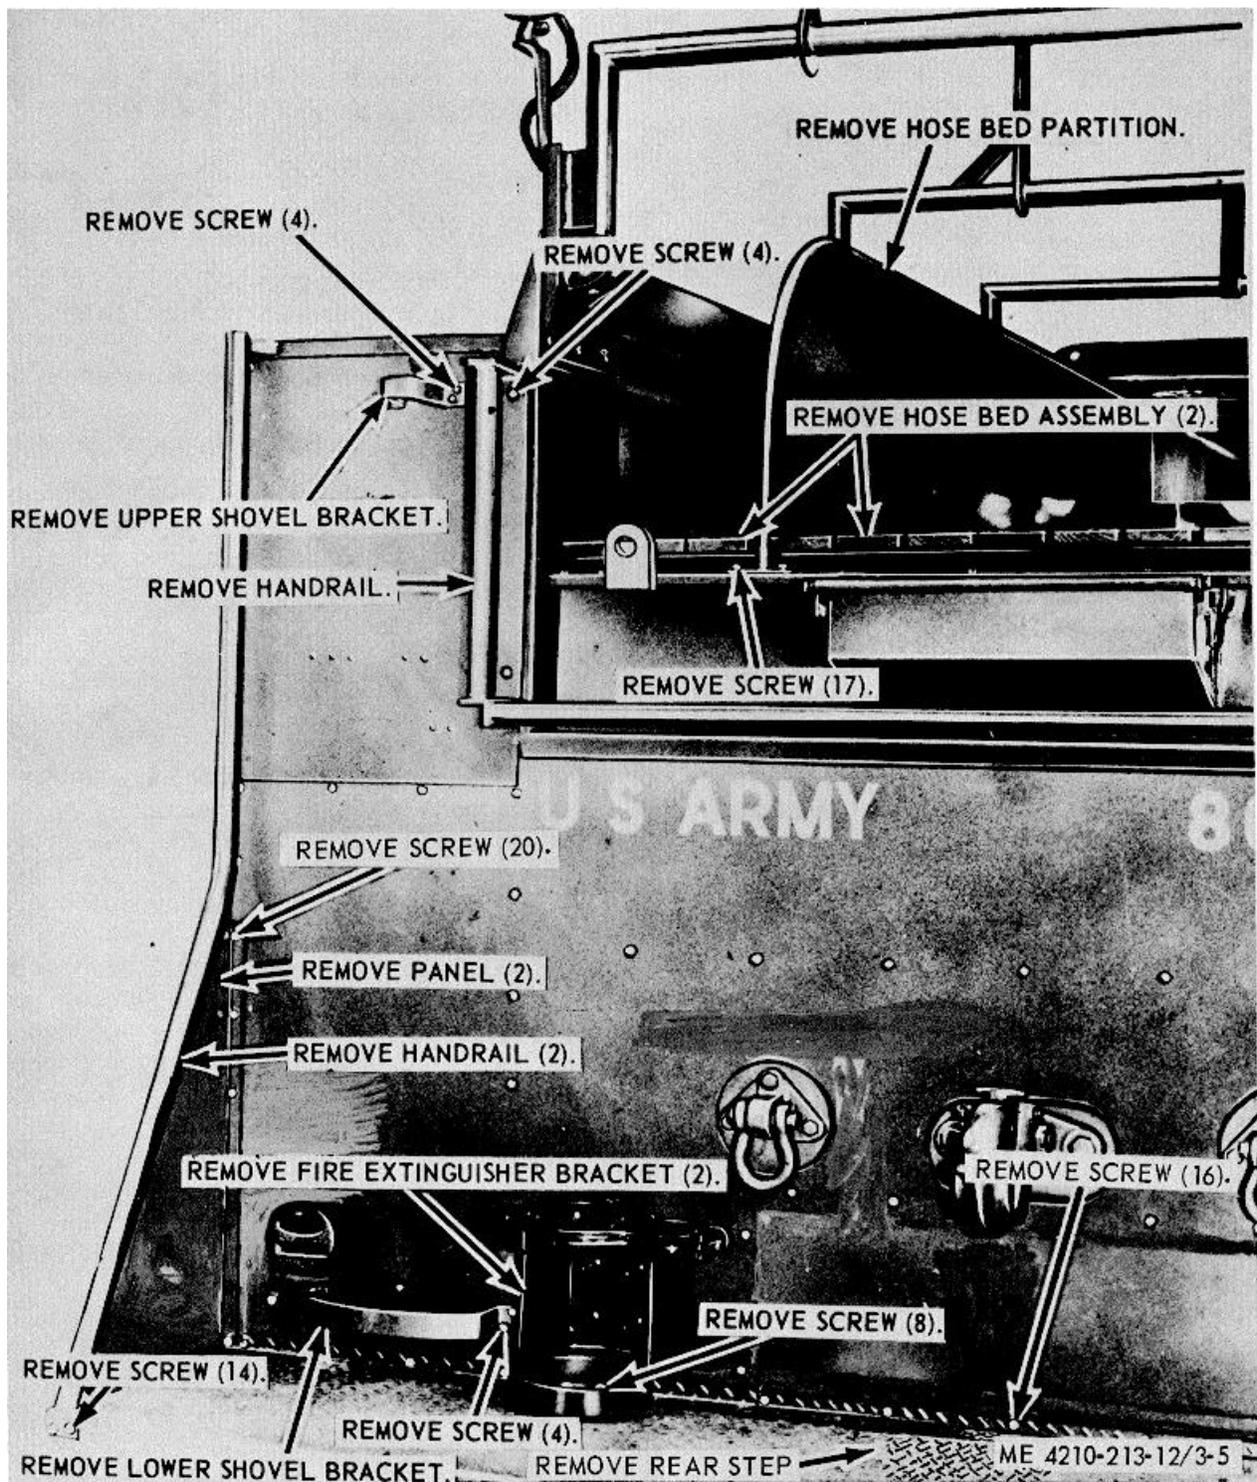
Hose bed assemblies, handrails, rear step, tool box door, and brackets, removal and installation.
